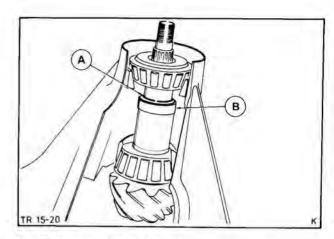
Determine length of spacer A – Ring of soldering wire B – Master spacer 15–024
